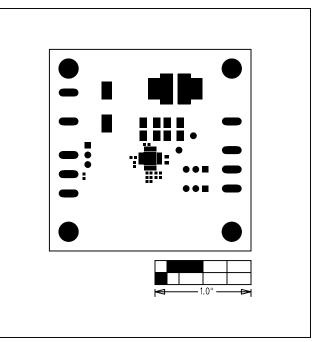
MAX17504 3.3V Output EV Kit Component Placement Guide—Top Solder Mask
